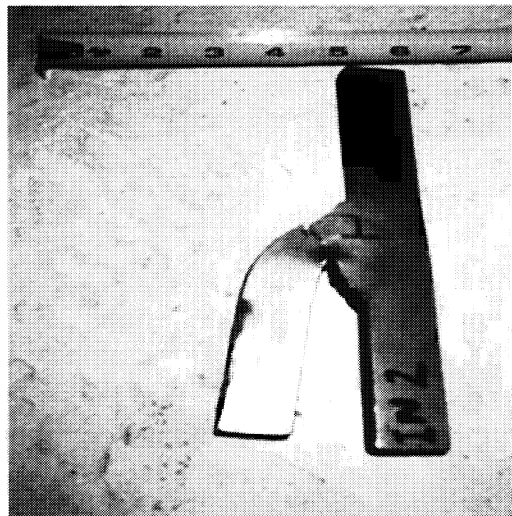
DWT test (down with root gap on top) on overlay repair with large cruciform defect (Accurate Weld Testing Laboratory specimen).
